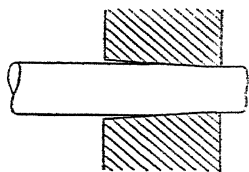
Section through Hole in Drawing Die with Wire passing through.
